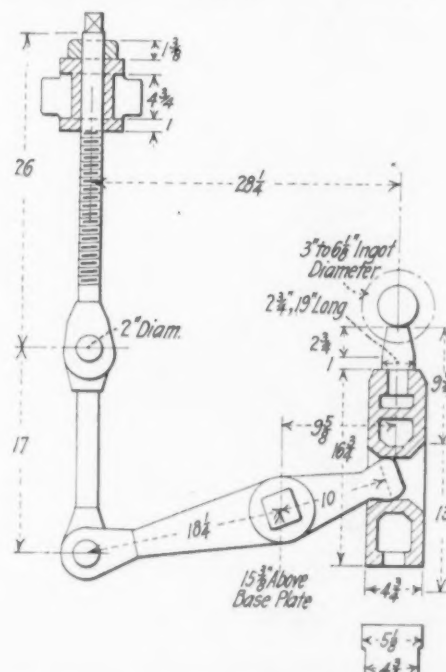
Lower Guide for Ingots Between the Rolls of a 14 1/4-in. Oblique Rolling Mill
